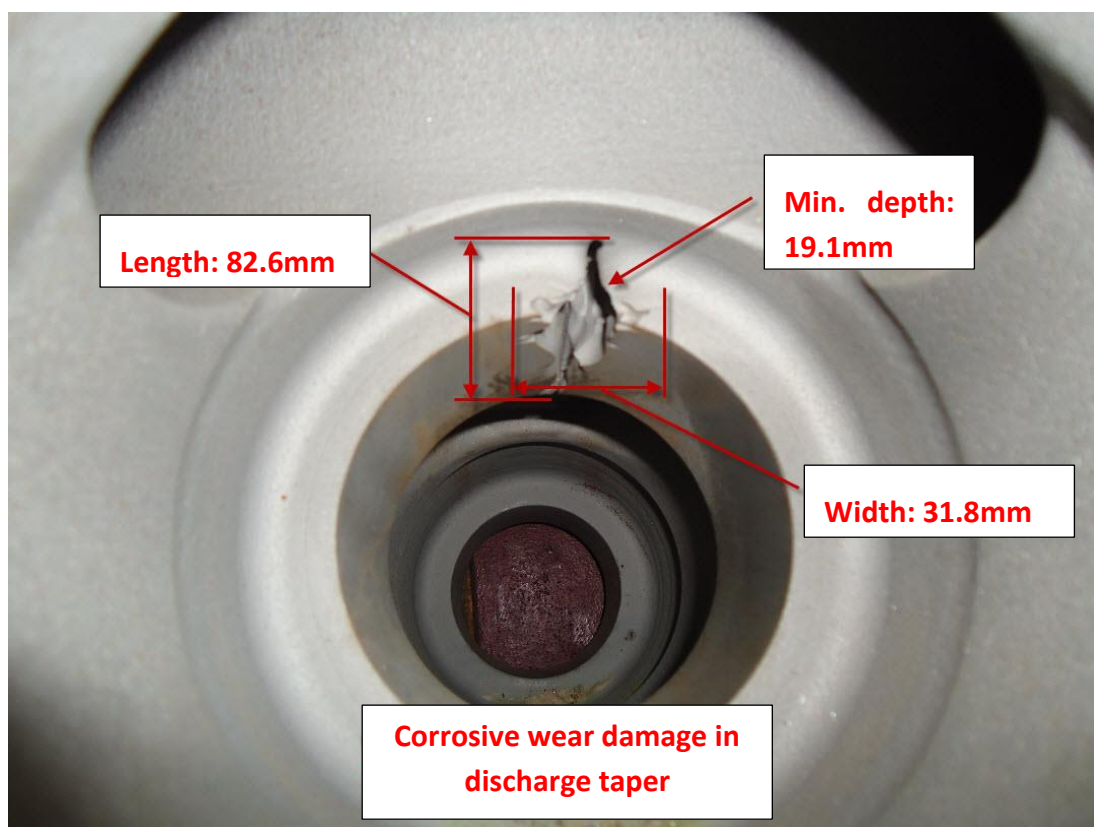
Corrosive wear damage occurring in the discharge taper in a hydraulic fracturing pump fluid end (courtesy of Weir SPM)
